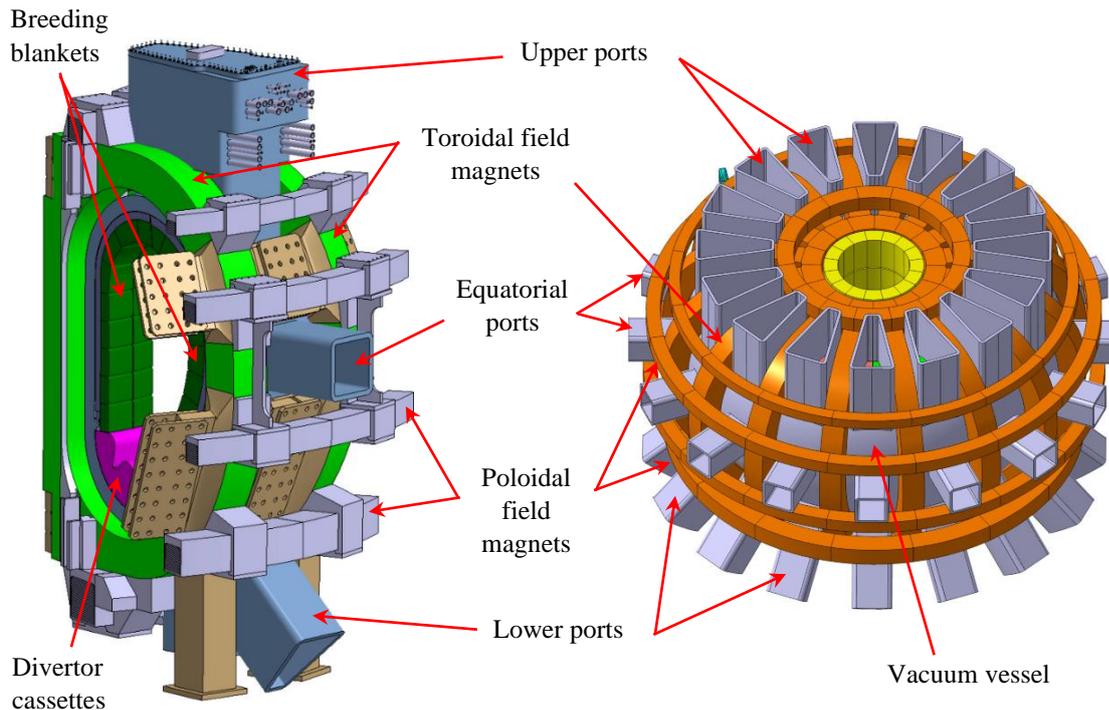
Left: section view of one machine sector; right: the magnetic cage, vessel, and ports
